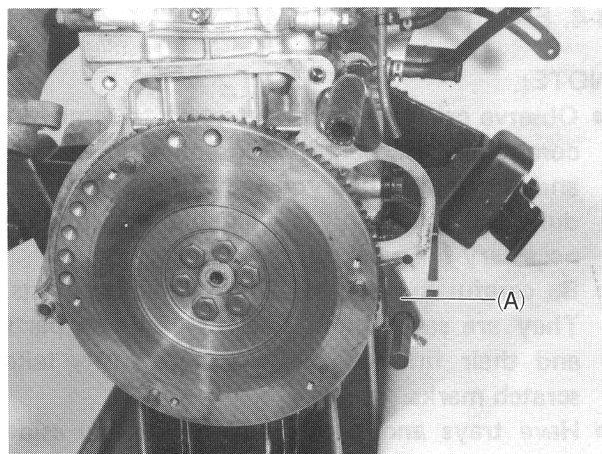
(A) Flywheel holder (Special tool 09924-17810)
